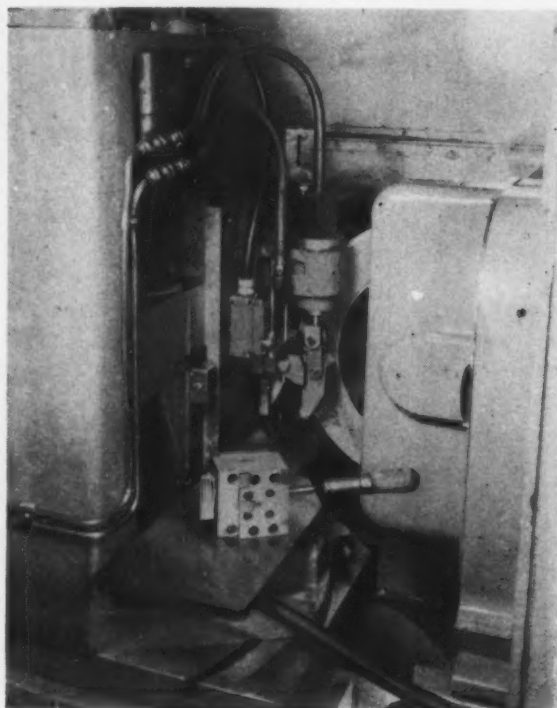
This vertical cylinder arrangement holds the fixtures containing the buckets during grinding. By placing the shuttle fixture in the machine locating nest and tripping a foot valve, the arrangement moves the work into grinding position and clamps it.
